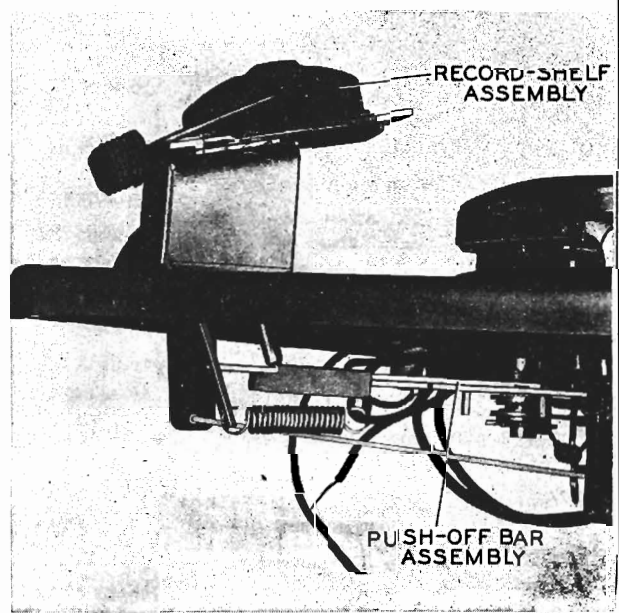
RECORD-SHELF AND PUSH-OFF ASSEMBLIES
